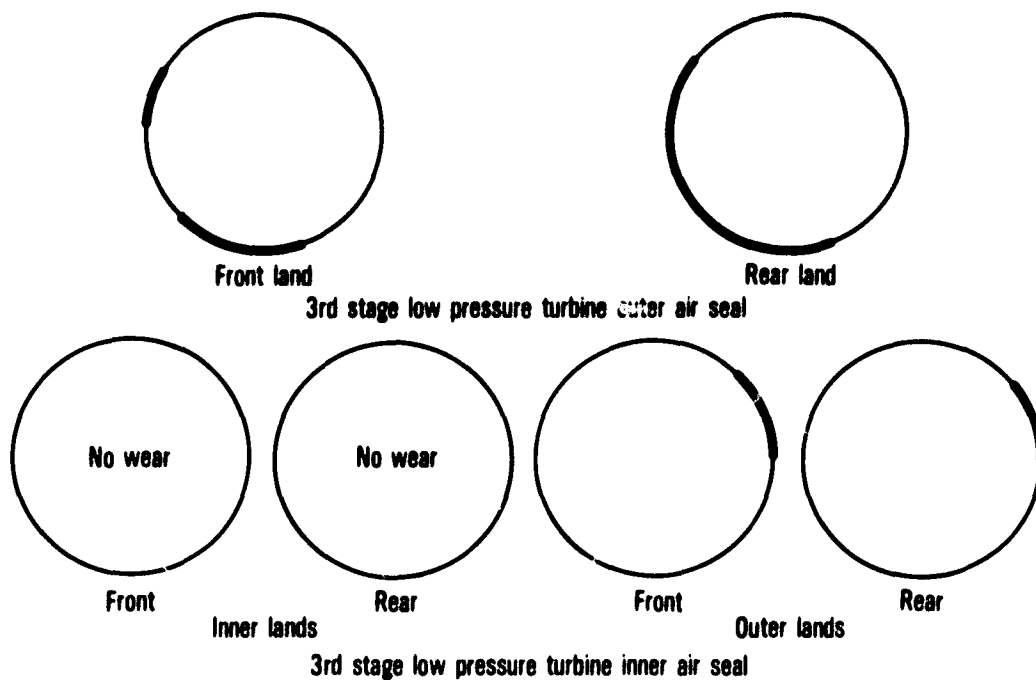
Teardown Wear Patterns (Rear View); Third-Stage Low-Pressure Turbine Outer and Inner Air Seals. (J23976-18)
